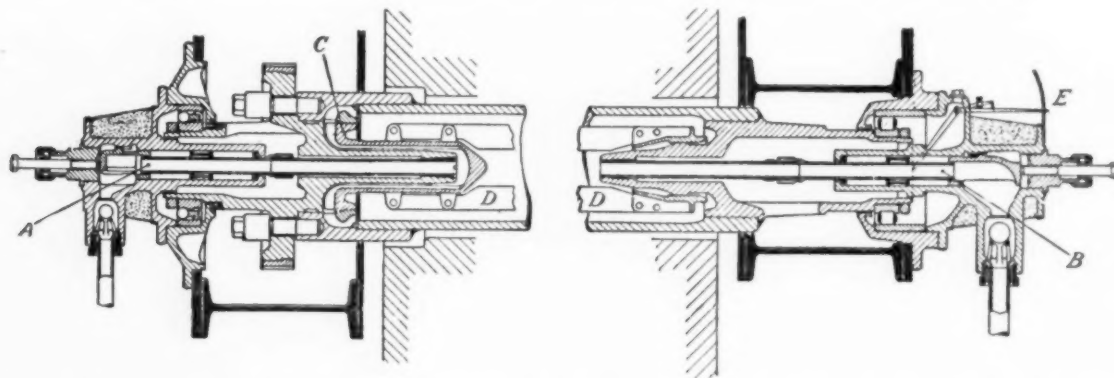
SECTION THROUGH A ROTOR OF THE ATMOS BOILER, SHOWING FEED CONNECTION (LEFT) AND STEAM CONNECTION (RIGHT)
